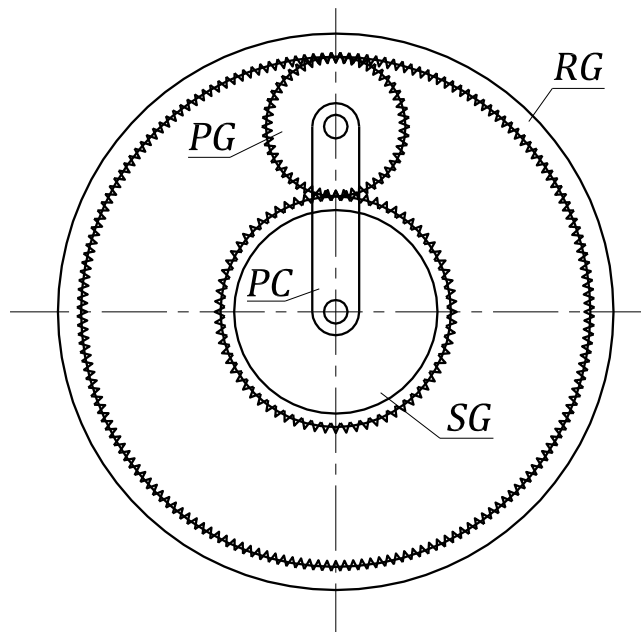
Planetary gear system used for running diagnostics on low-speed ball and roller bearings
